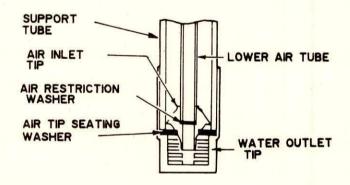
SUPPORT TUBE AND AIR TUBE FITTINGS
